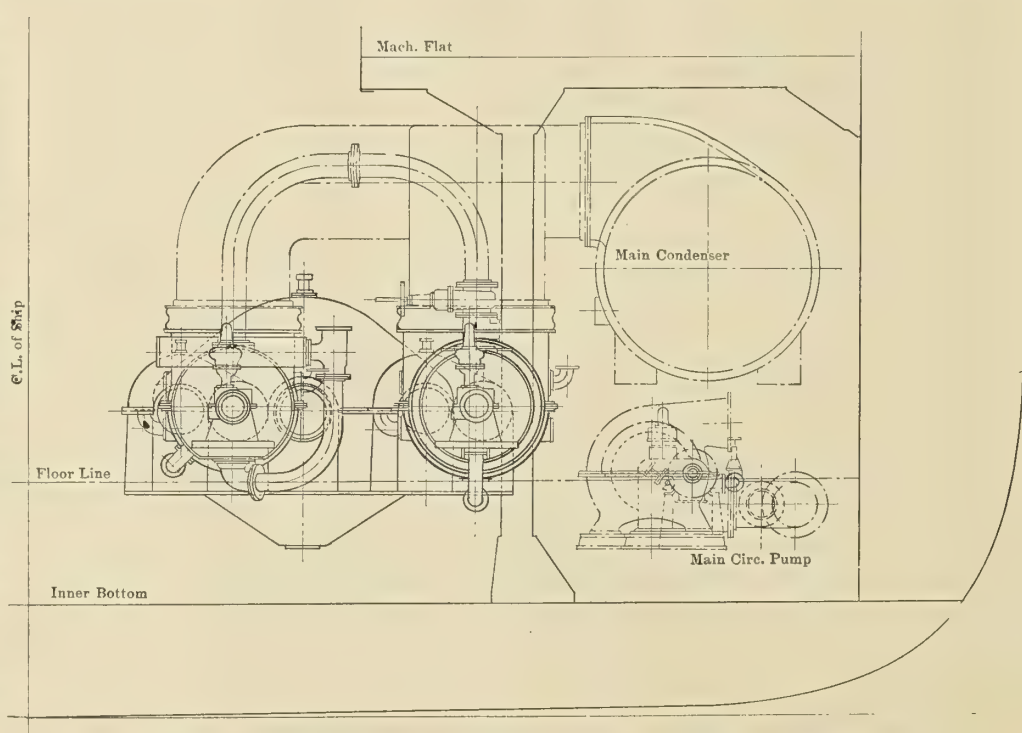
Half-Section Through Engine Room at Frame 35, Looking Aft
